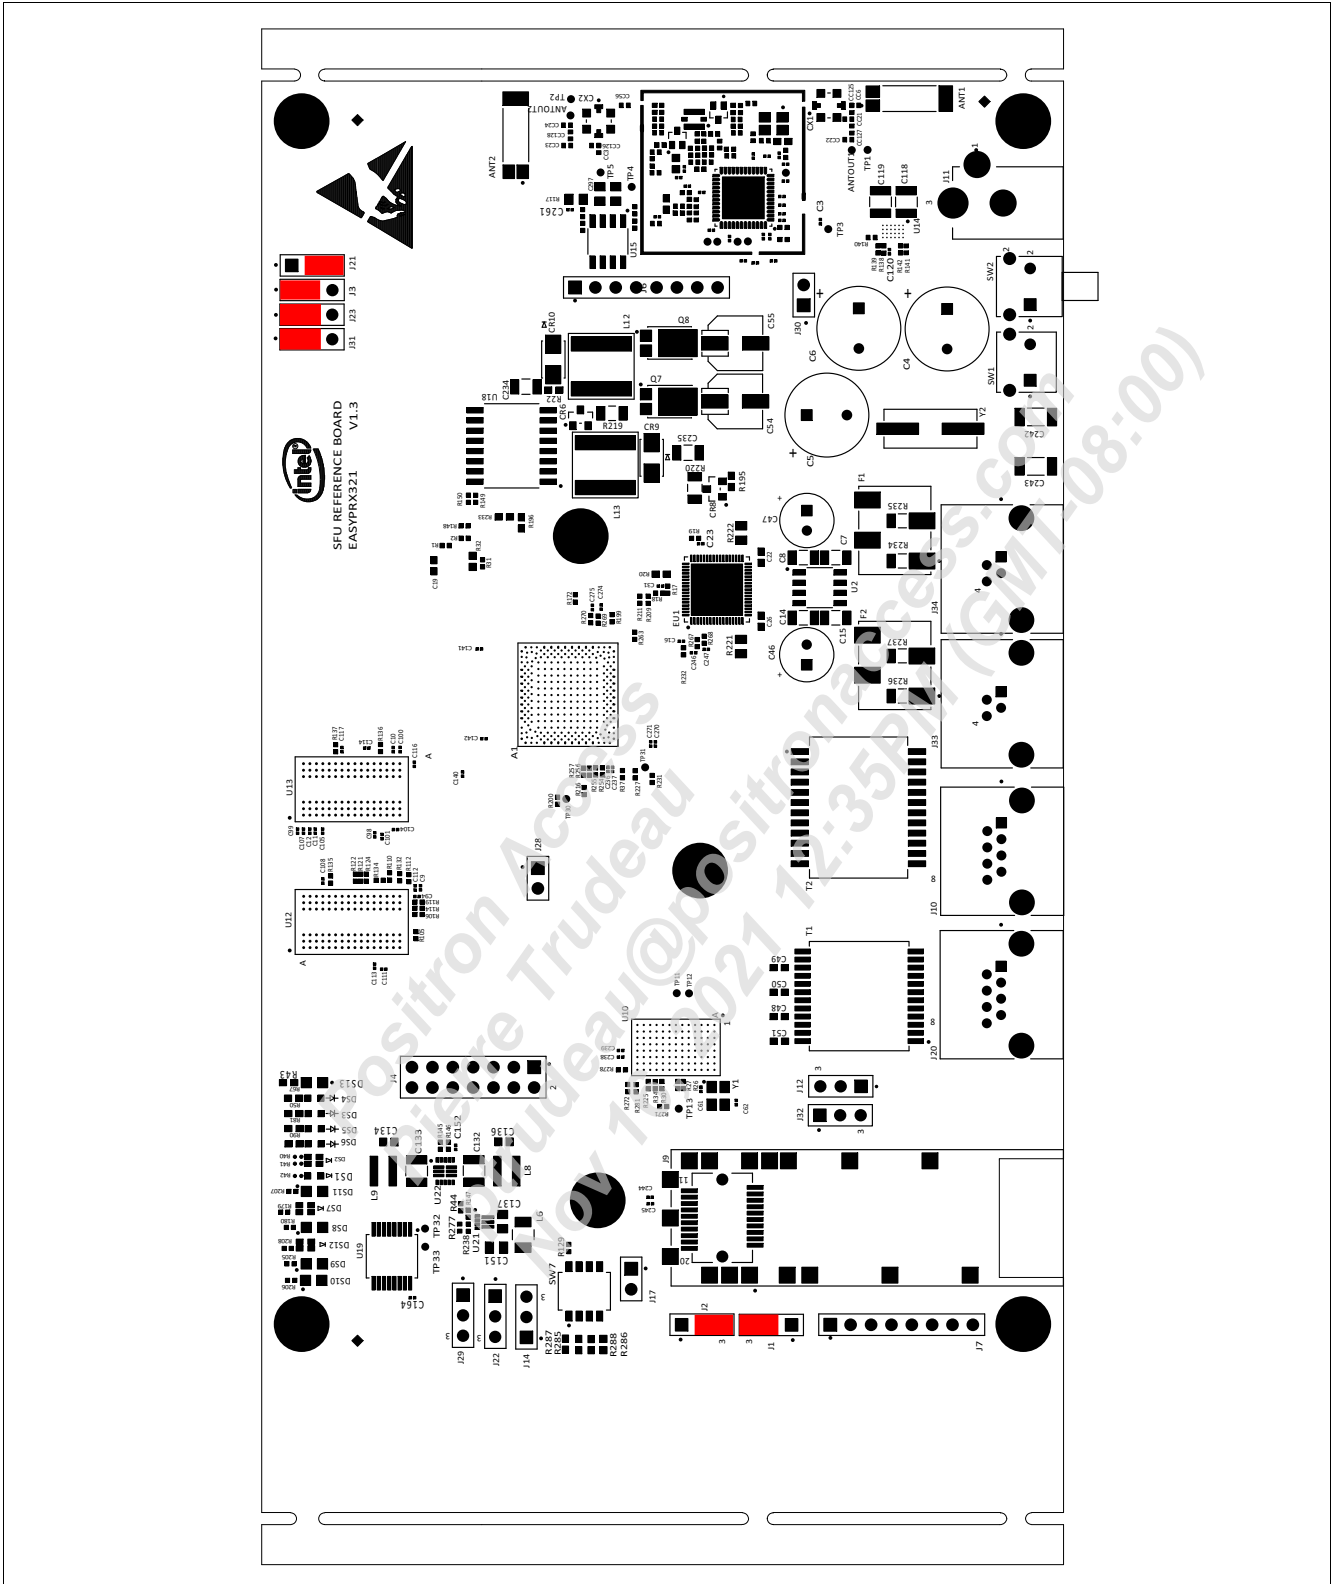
Default Jumper and Mounting Option Selection (Top View)
